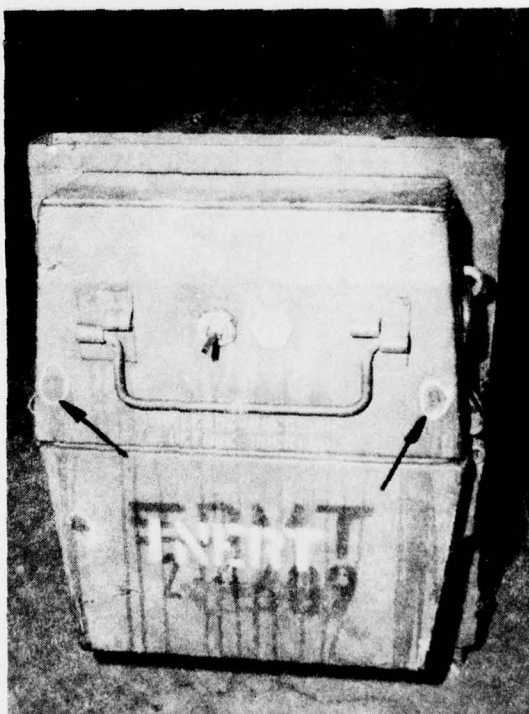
LEAKS AT SPOT WELDS, FRONT END
